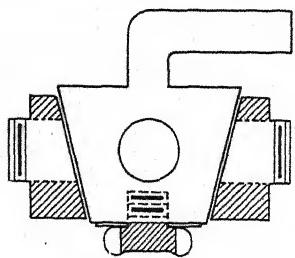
Diagram showing plug valve with dead end formed by the threaded hole and screw assembly. (See page 167.)
